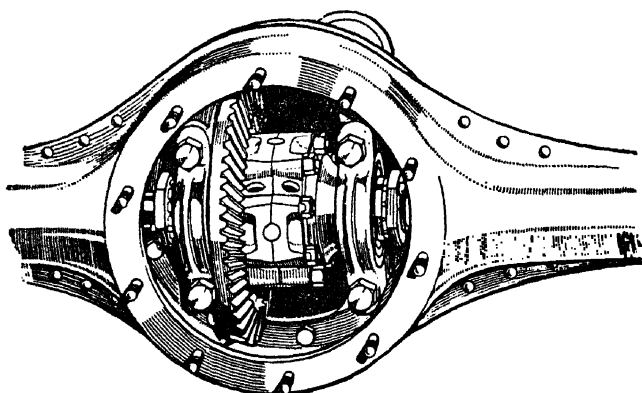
Back Axle Casing, with Cover removed to show Differential Gears.
